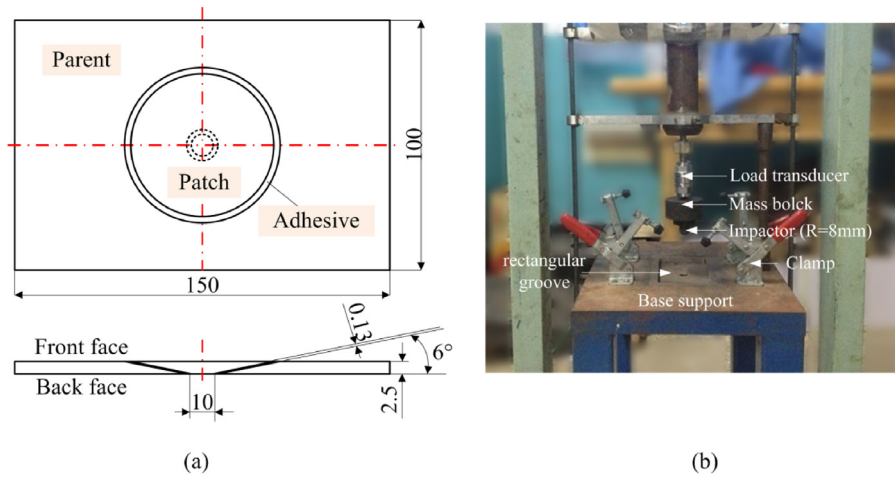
Experimental conditions. (a) Specimen geometry (unit: mm); (b) drop weight impact test fixture.
